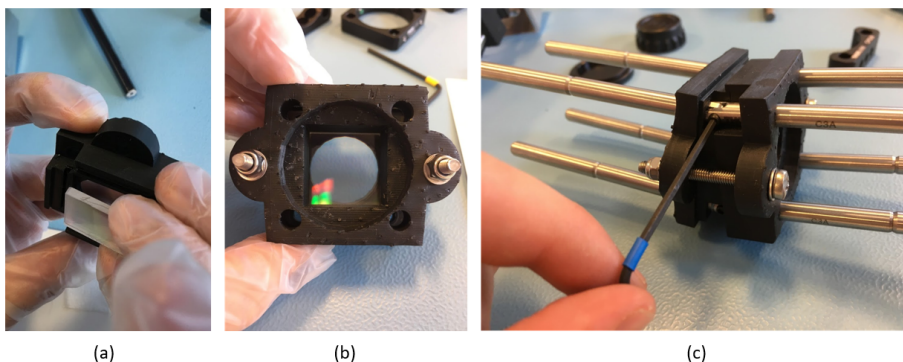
Grating holder assembly. (a) Insert the grating in half of the housing, (b) press fit the other half and secure it with bolts, (c) assemble cage rails on each side of the housing independently and join them in the center with the small included screw.
